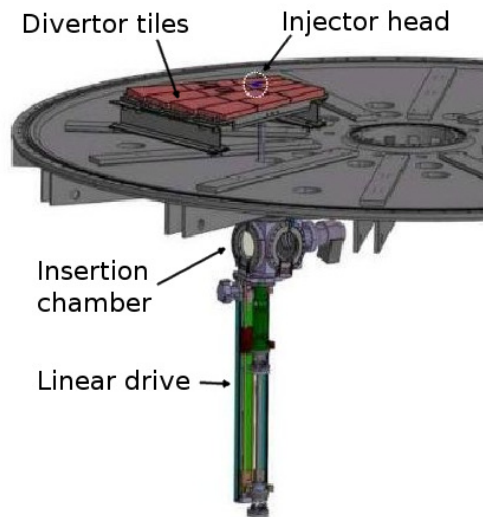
Schematic overview drawing of the DSF showing the insertion system and the independent pumping system. The drawing shows the DSF configuration when the head is fully inserted into the machine
